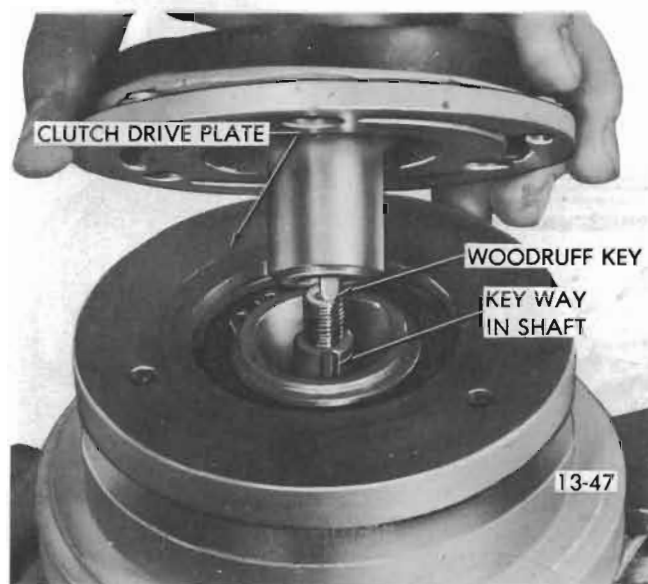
Positioning Clutch Drive Plate on Shaft
